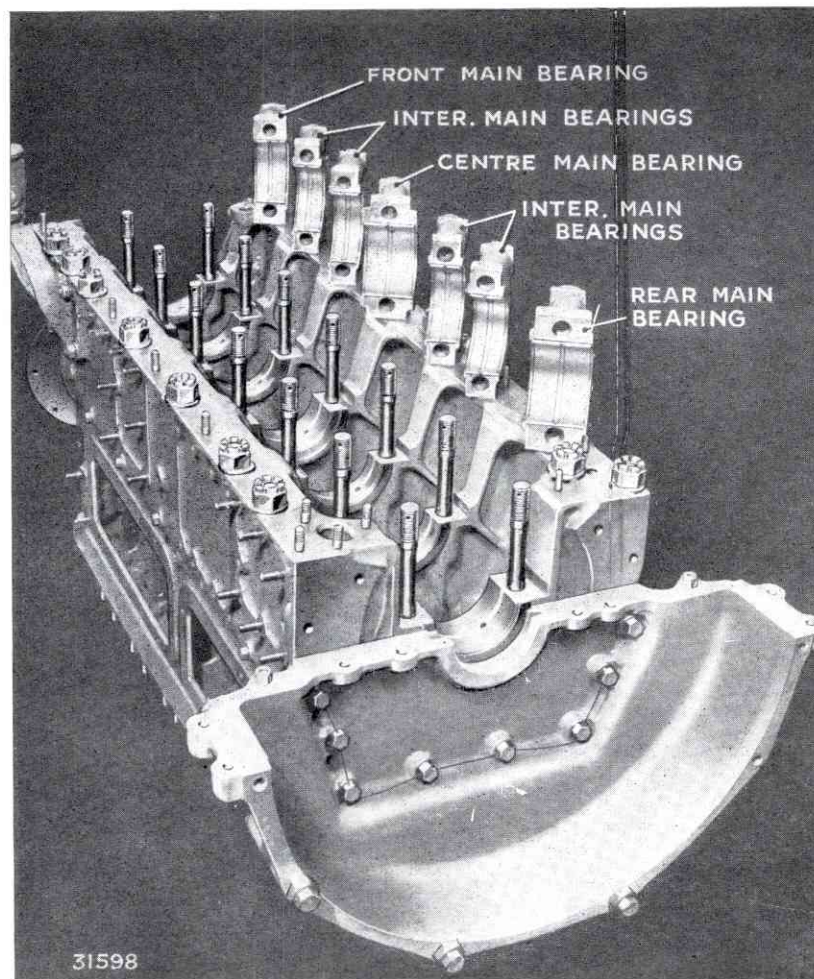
ENGINE BLOCK AND MAIN BEARINGS
